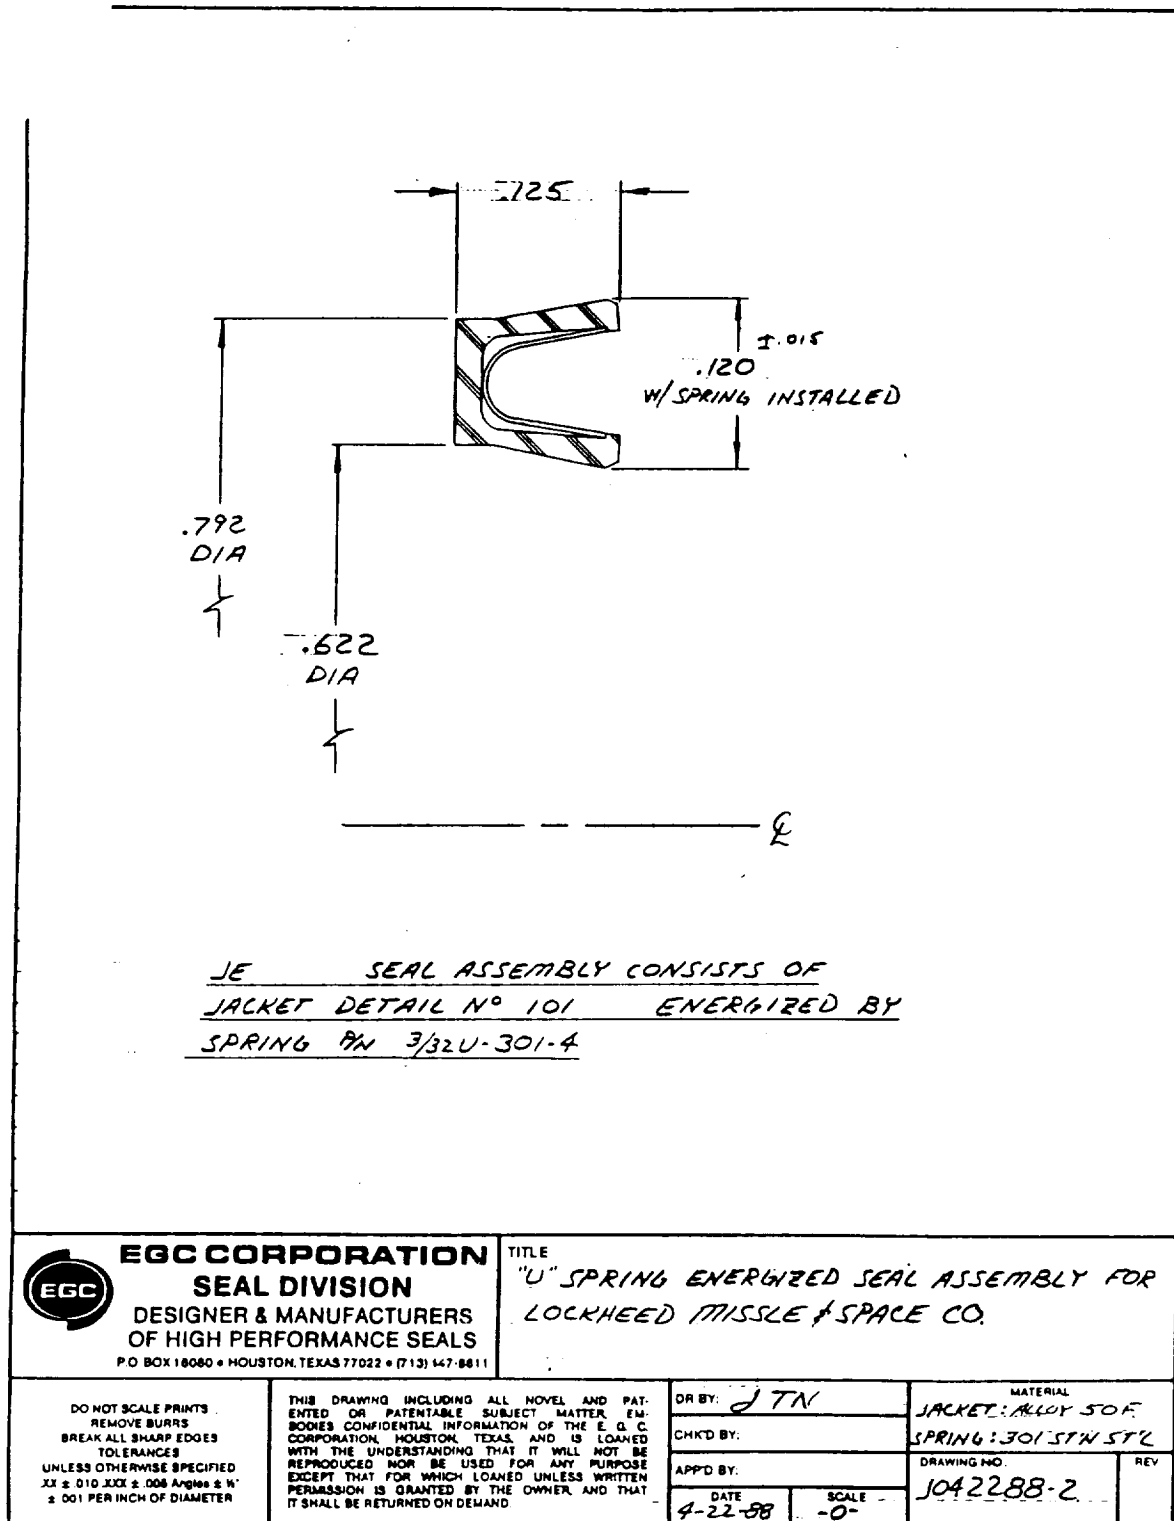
Detail Dimensions for Spring Energized Lip Seal Design (EGC Corp., Houston, TX)
